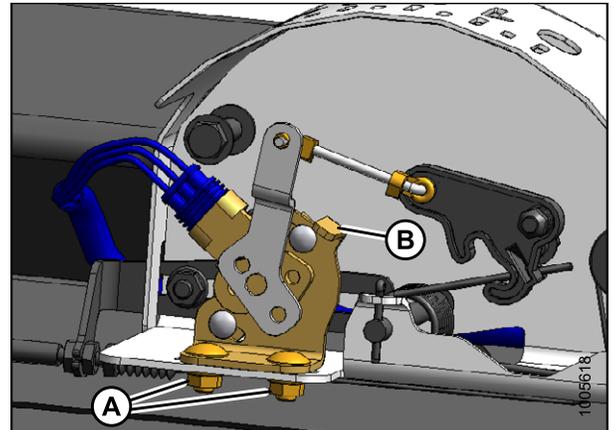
Auto Header Height Sensor Assembly for use with Lexion combines
